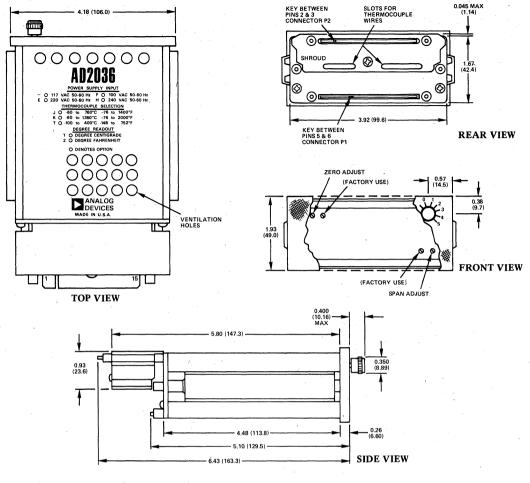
AD2036 Mechanical Outline (Dimensions shown in inches and (mm))
